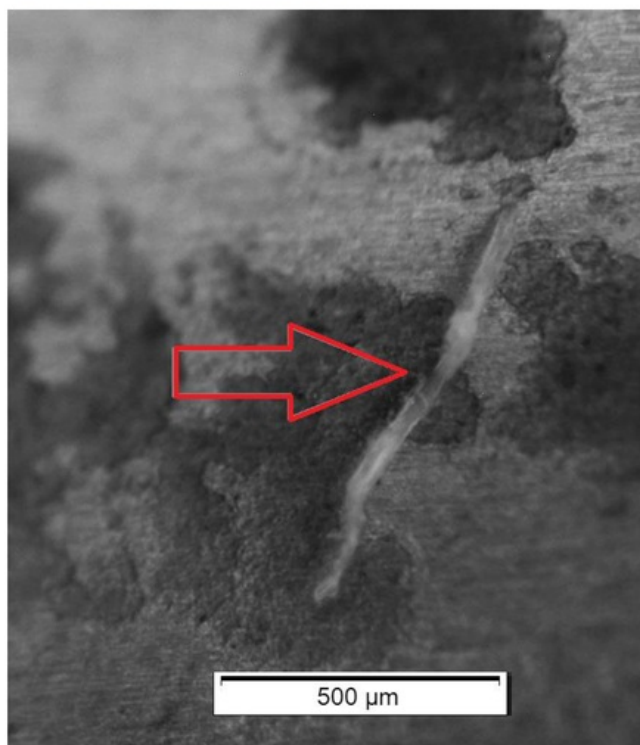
Bearing 4.2 outer race gouge and surface contamination
